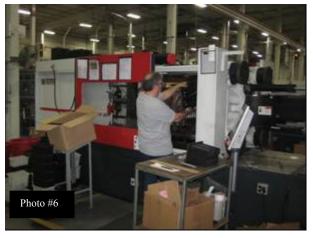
Facility 2 – Injection Molding Plants IM1/IM2 Equipment.
